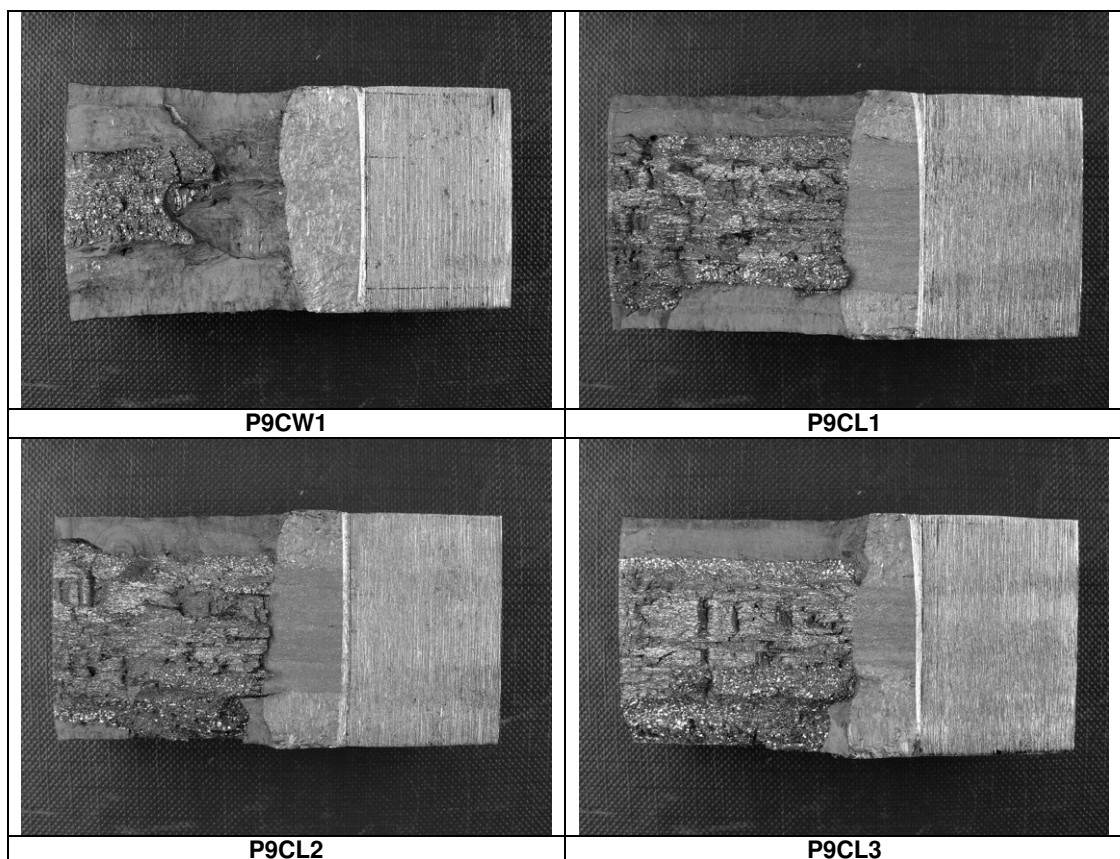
Fractographs of CTOD samples from 30 mm thick SAW weld with (P9).
